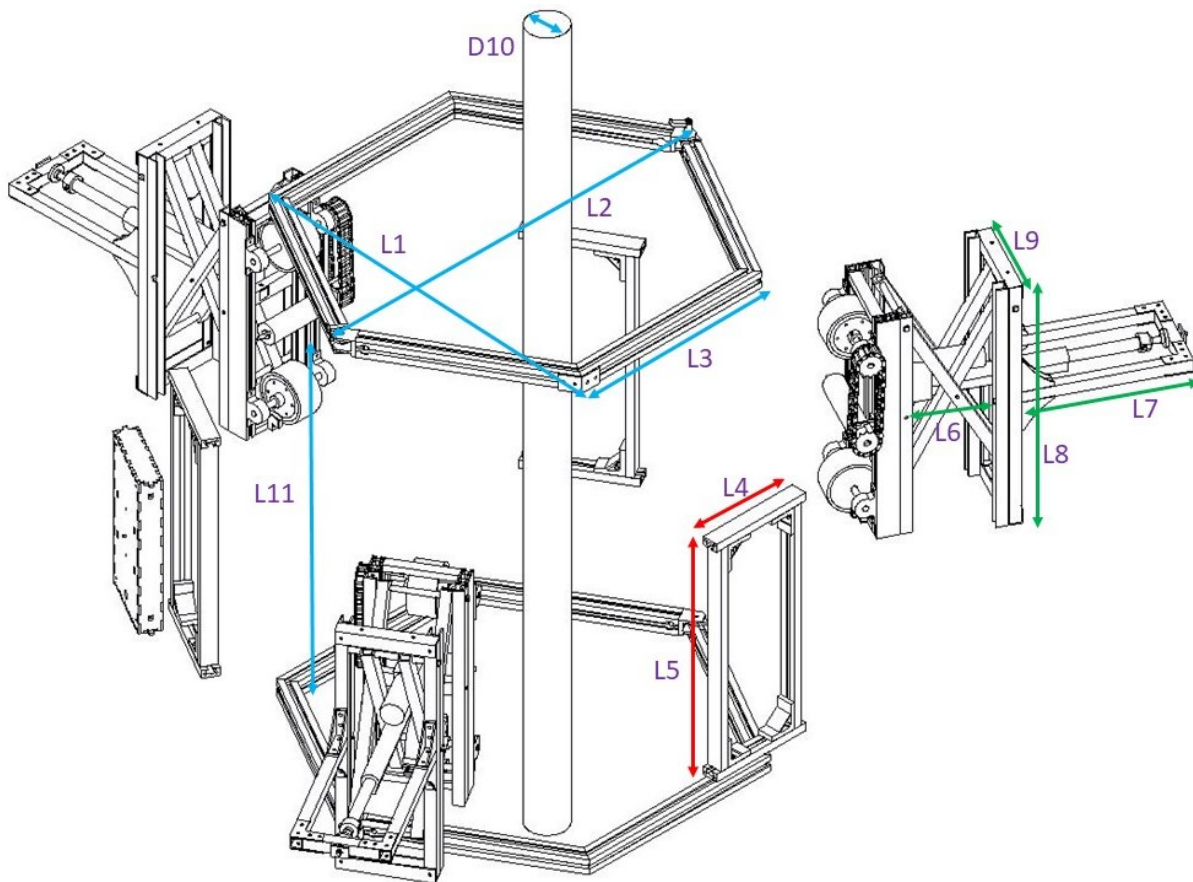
RESTRICTING DIMENSIONS IN THE DRIVETRAIN DESIGN
